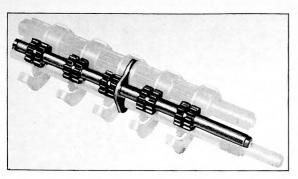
PUSH-BUTTON GEAR TRAIN IN POSITION TO REMOVE SLOTTED-PINION SHAFT
